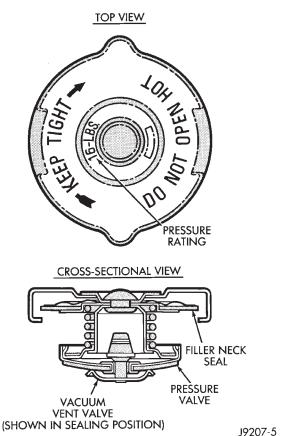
Radiator Pressure Cap and Filler Neck— Typical
